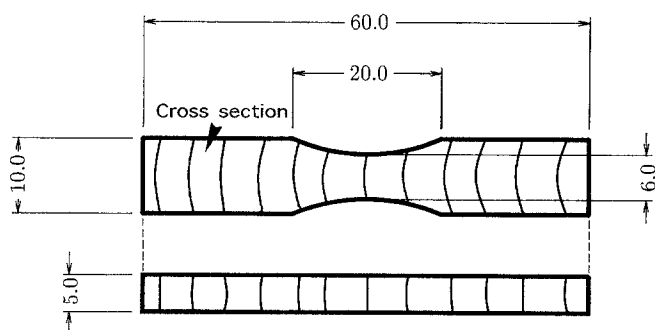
Test specimen. Units in millimeters. The specimen was bolted with attachments at the top and bottom of the cross section up to 20 mm away from the both ends of the specimen
